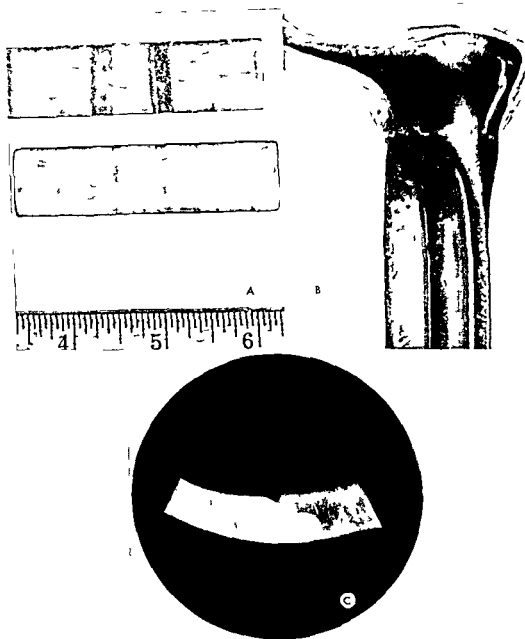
(A) Corrosion on either side of a weld. These two steel bars each consist of two bars welded together at the middle. Artificial corrosion in a chemical shows how the attack occurs on either side of the weld at the heat affected zone. (Courtesy of Crucible Research and Development Laboratory.) (B) This photograph of a nail plate with a welded junction demonstrates corrosion on the nail adjacent to the weld. The metal surface is severely pitted after only a few months in the body. (C) Photograph of an etched metallurgical specimen showing a welded head of a femoral prosthesis. In order to make the globular head two half globes may be fitted together then welded. The site of welding is surrounded by altered metal structure resembling ripples spreading from a stone dropped into water.
